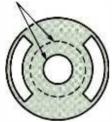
You must modify the universal shaft coupler by enlarging the $\frac{1}{4}$ -inch hole to $\frac{5}{16}$ -inch on half of each coupler. Optionally, replace the set screws with 6-32 screws.
